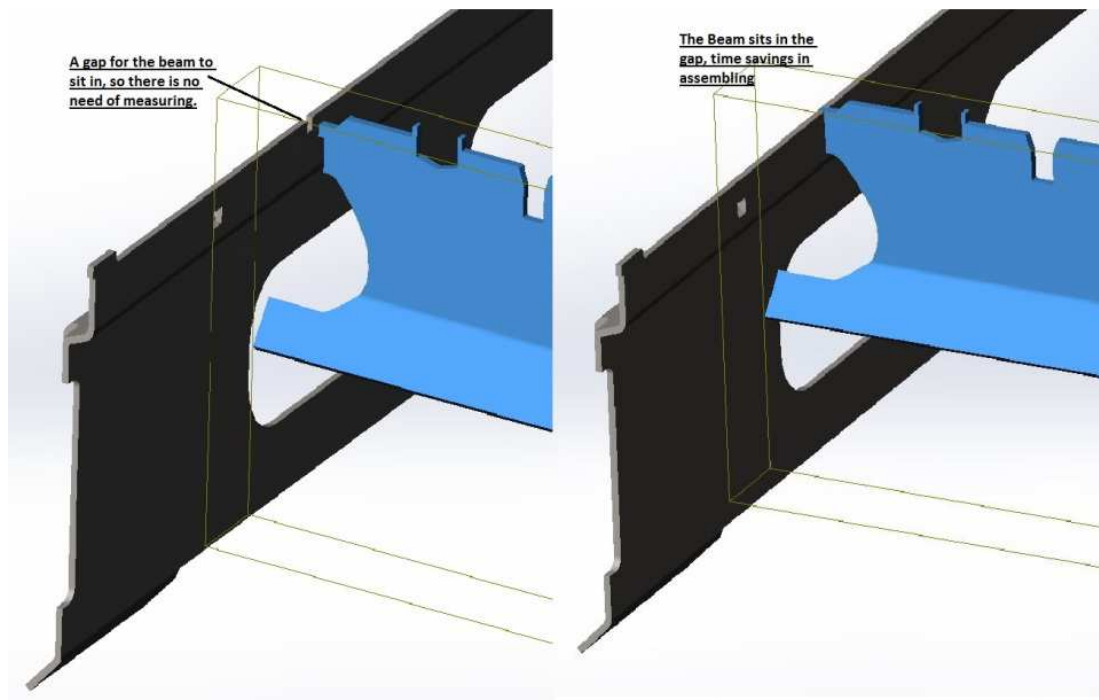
Plates are cut so that they can be easily put together, no measuring, welding guides, fits just like LEGO™
